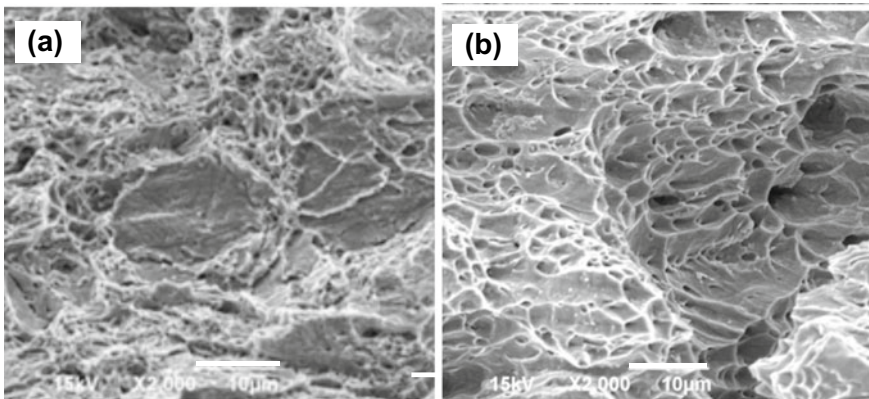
Tensile-fracture surfaces of Type 304 stainless steel (a) with and (b) without hydrogen charging (Hatano et al. [65])
